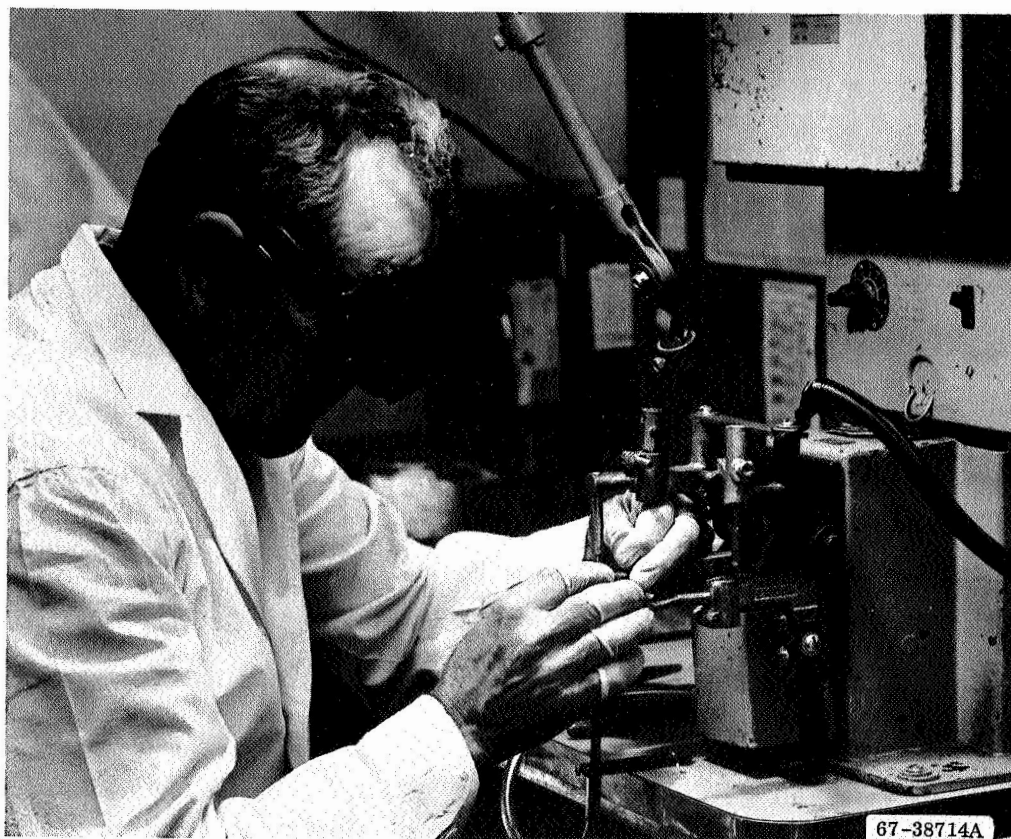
Resistance Welding of Diode Test Vehicle
